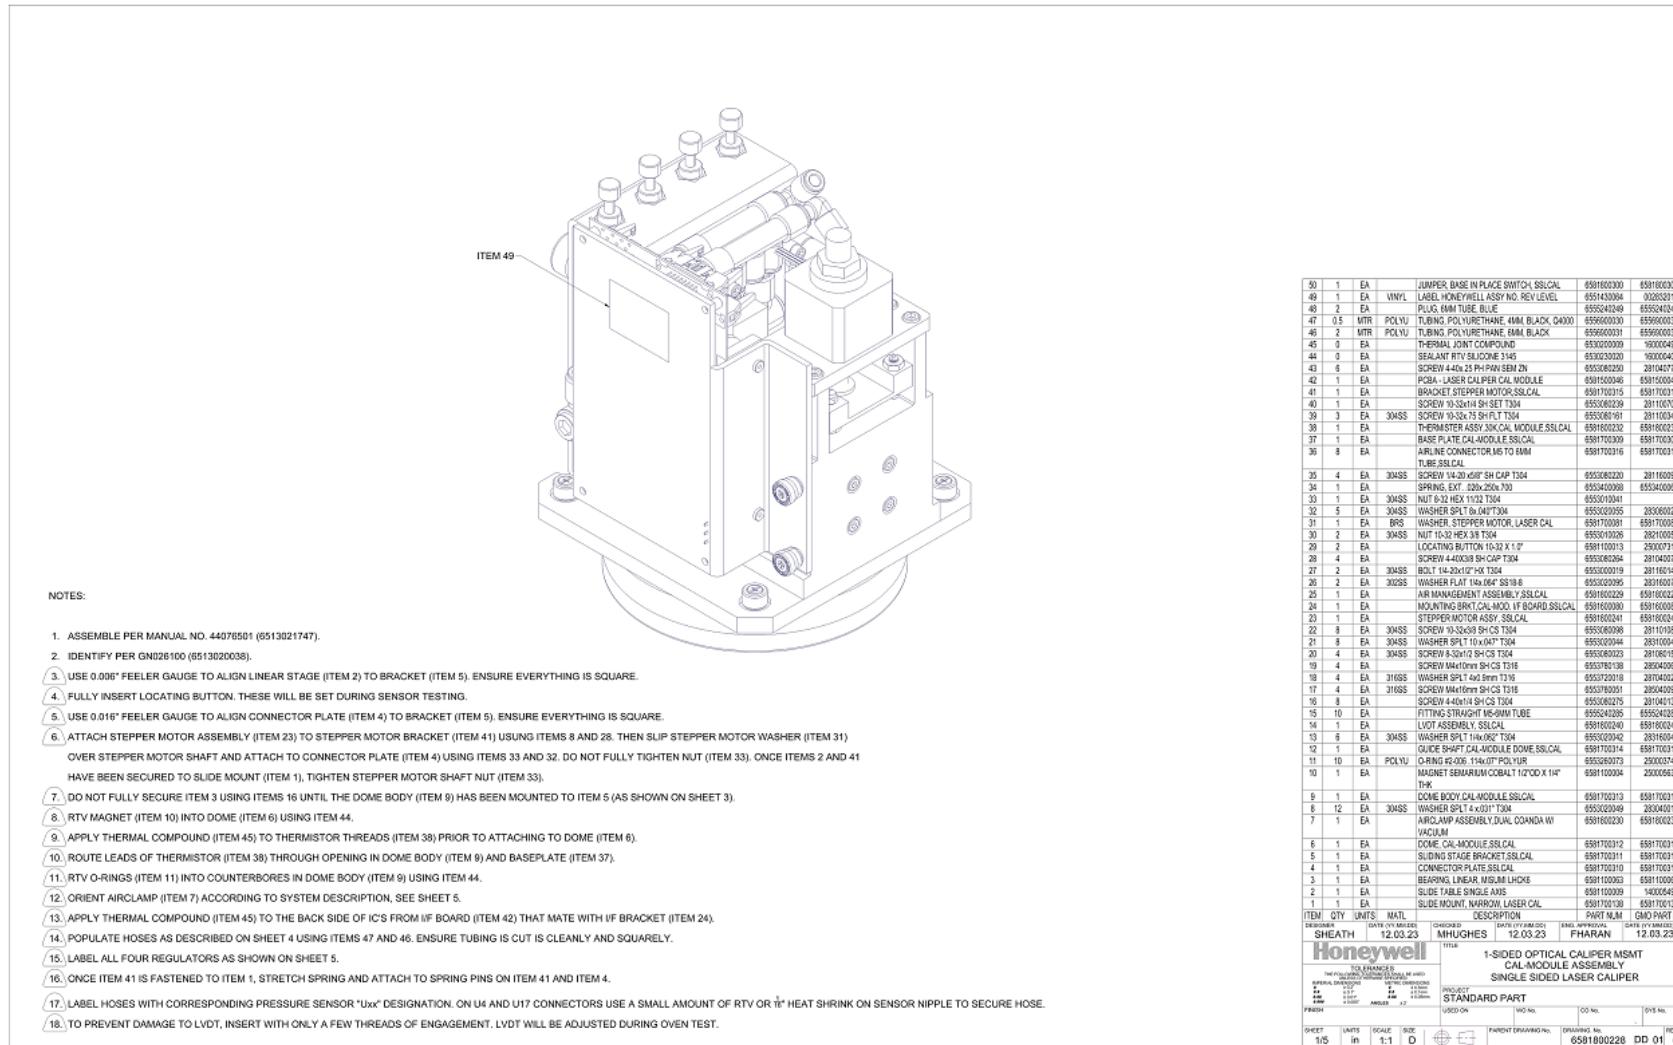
Laser Caliper Sensor CAL-module Assembly (1 of 5)
